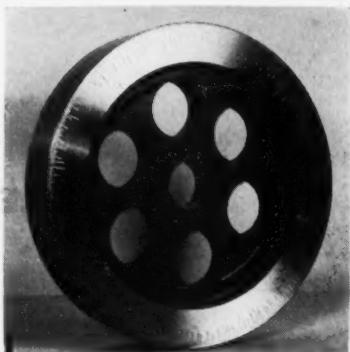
Surface cracks in plug gage, resulting from a too severe grinding operation. Cracks made visible by wet magnetic particle method. (2/3 actual size)
